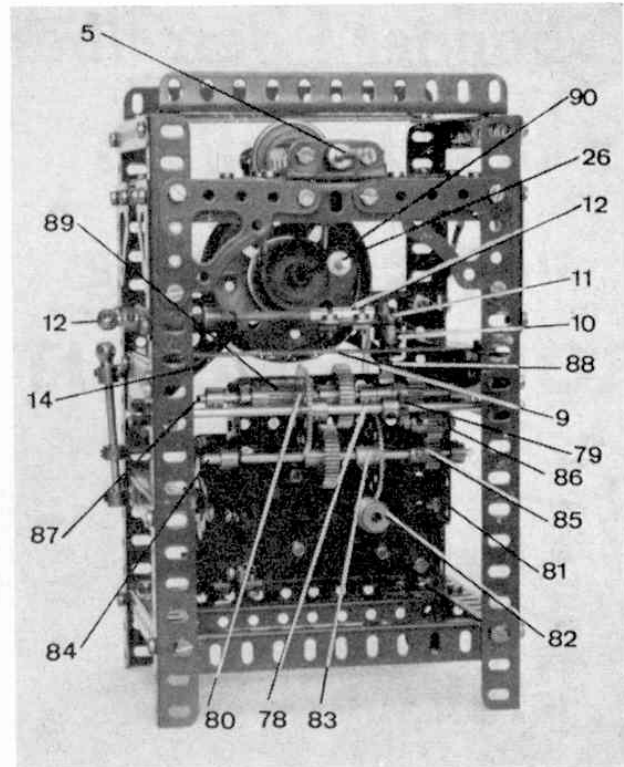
The Motor and gearing, in their framework, removed from the remainder of the Lathe.
